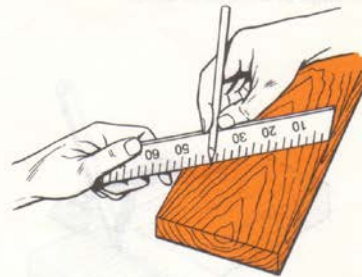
11 A Convenient Method of Dividing a Piece of Stock into Five Equal Parts
